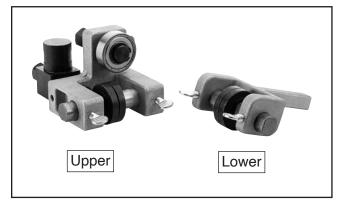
T27908 "Euro-Style" Roller-Disc Guides.
